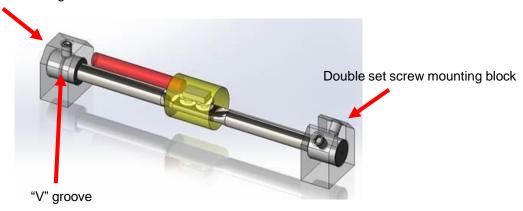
FINAL VWSG-A ASSEMBLY
